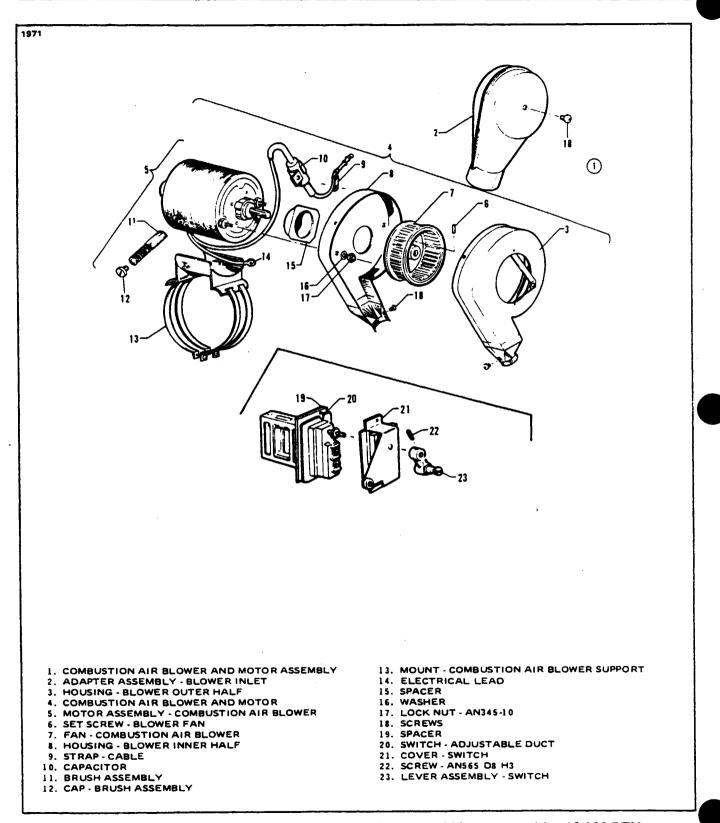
Exploded View - Combustion Air Blower and Motor Assembly (45.000 BTU)
